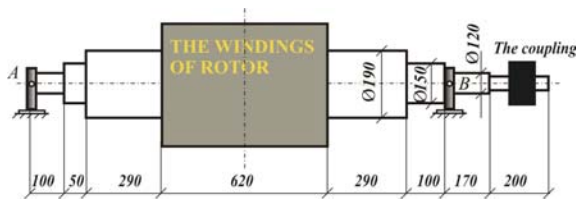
The shaft is supported by a journal bearing at B and a thrust bearing at A.
